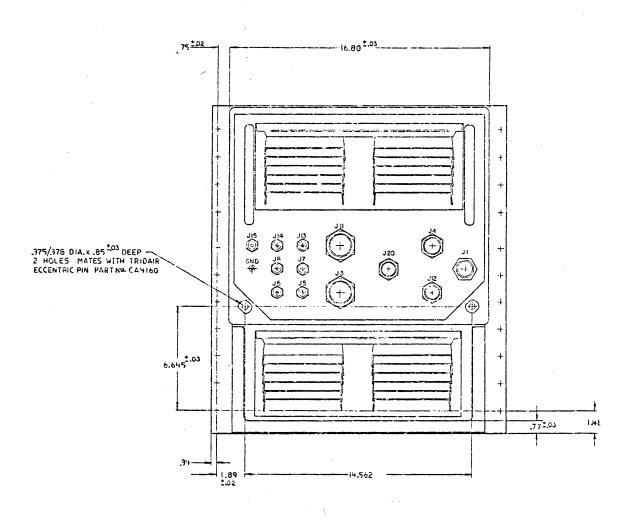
Outline and Installation Display Driver Assembly (Sheet 3 of 3)
